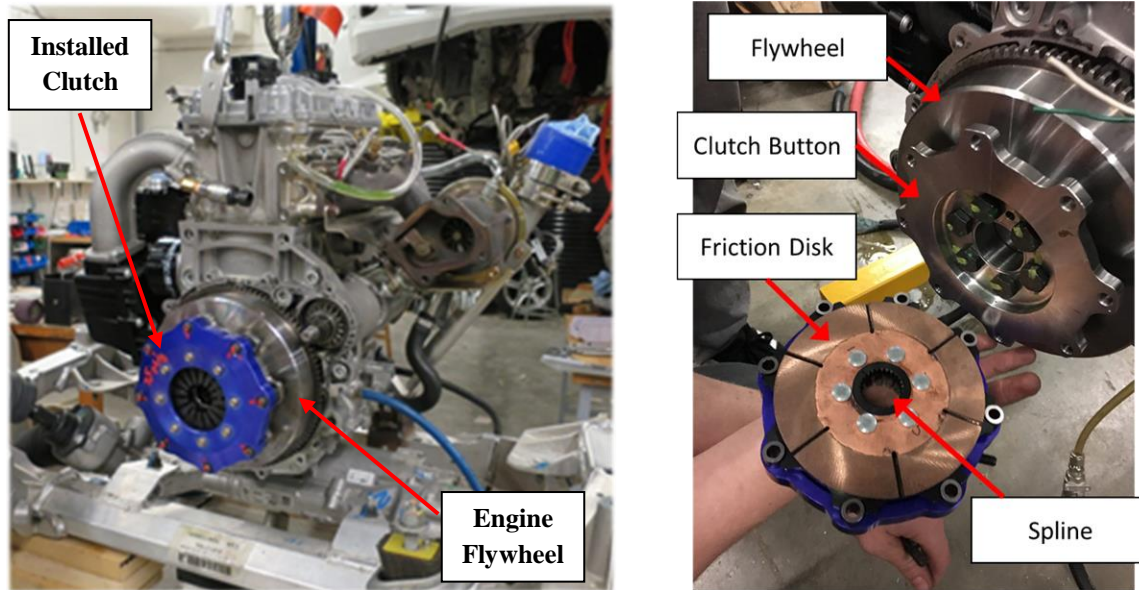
Friction Clutch – (left) installed clutch, (right) disassembled clutch
